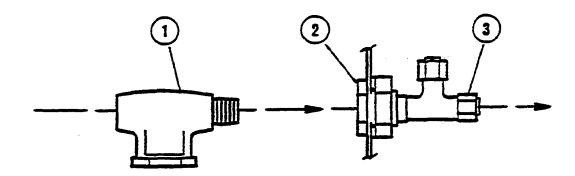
COLD WATER INLET STRAINER ASSEMBLY
